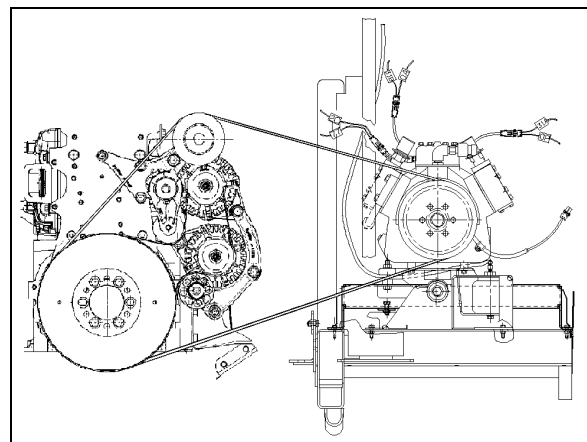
A/C COMPRESSOR BELT ADJUSTMENT 22288
